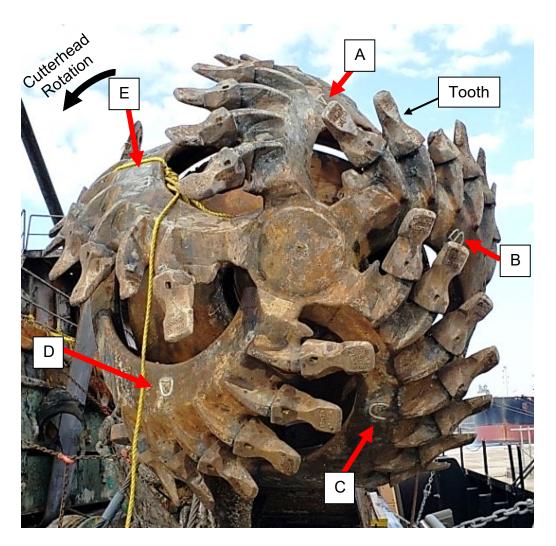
Front view of cutterhead assembly after underwater recovery (looking aft). The cutterhead assembly contained 5 blades, labelled by the manufacturer as "A", "B", "C", "D", and "E".
